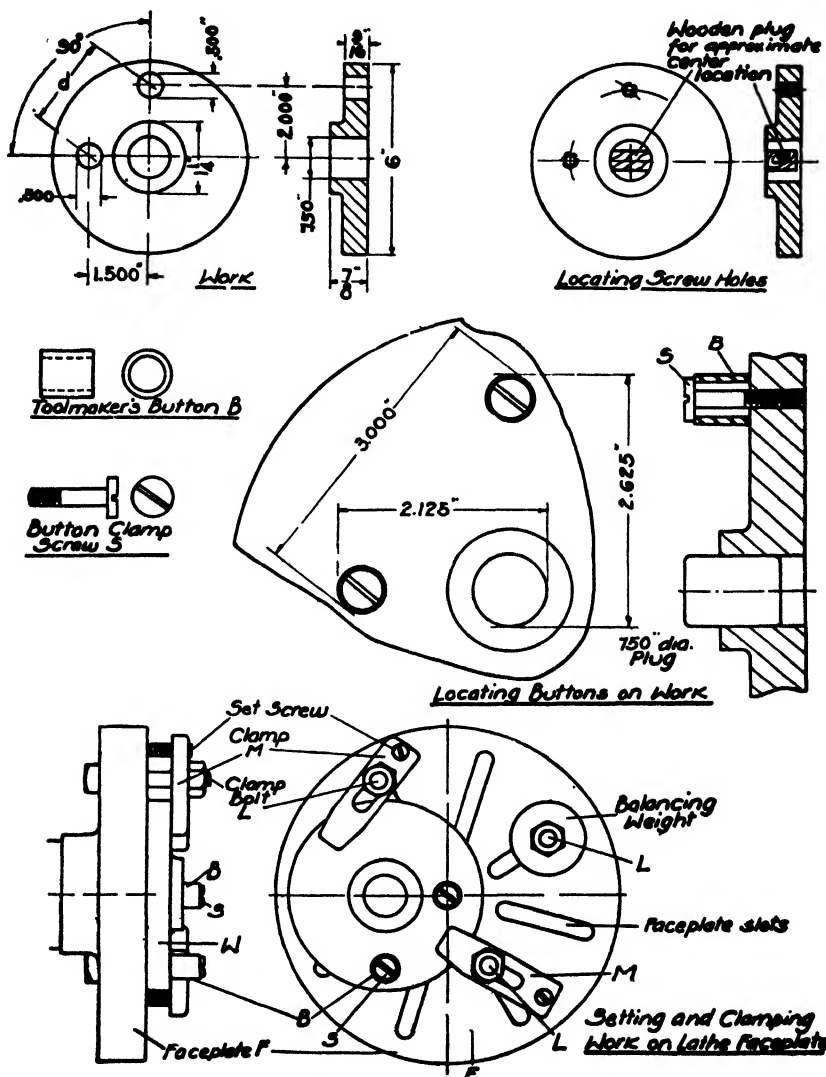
Locating Holes Accurately by Using Toolmakers' Buttons.
